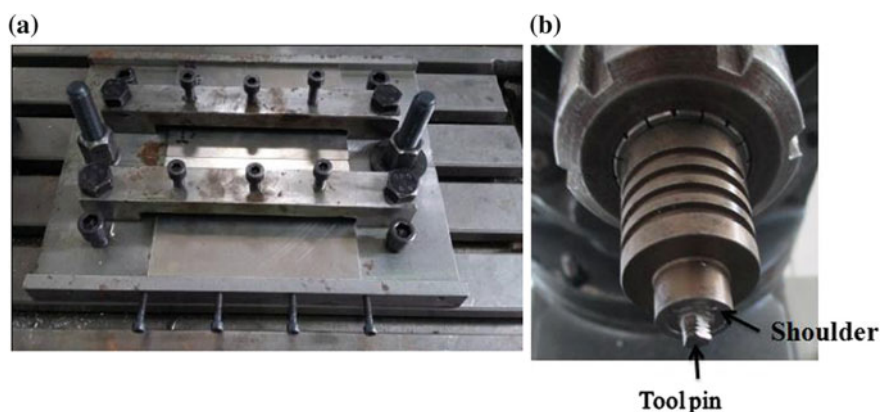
Friction stir welding process a the clamping devices, b welding tool shape
